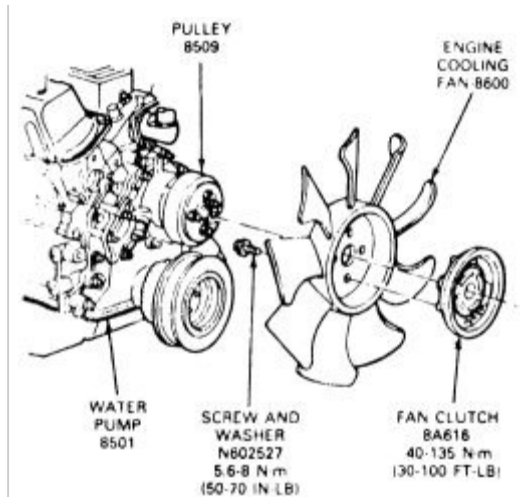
Exploded view of the engine fan for the 4.0L engine
